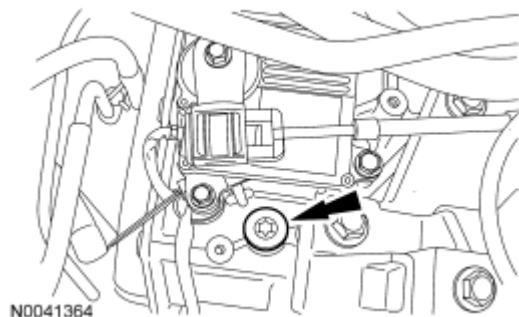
Locating Transaxle Control Cable Bracket Bolts
